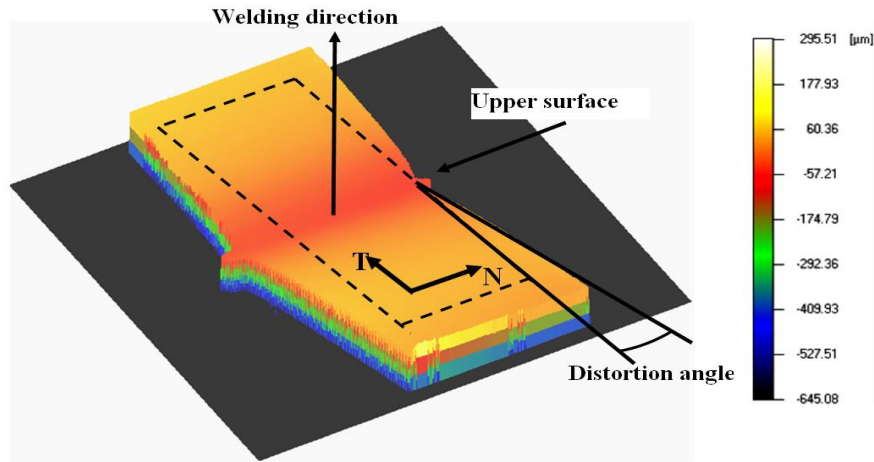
A scanned surface profile for a GTA weld.
